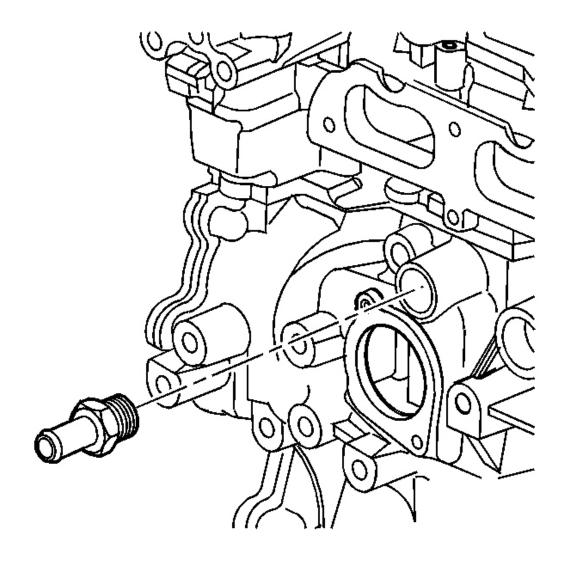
View Of Heater Outlet Hose Fitting Courtesy of GENERAL MOTORS CORP.
